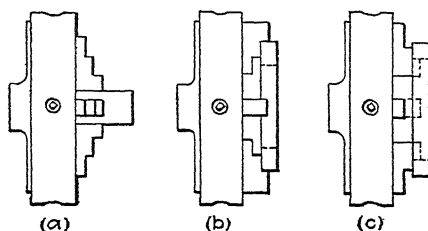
Illustrating three ways of holding work in a chuck. In (a) and (b) the work is held by gripping it on the outside; in (c) the jaws grip the surface of the hole with an outward pressure. It will be noted that such a piece of work as the ring illustrated may be faced on one side and bored when held as in (b), and the other side faced and the outside turned when held as in (c).
